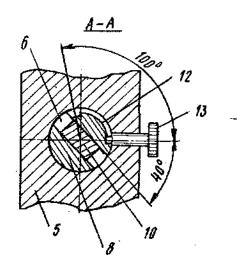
the device is an electrode holder for welding inclined electrode
